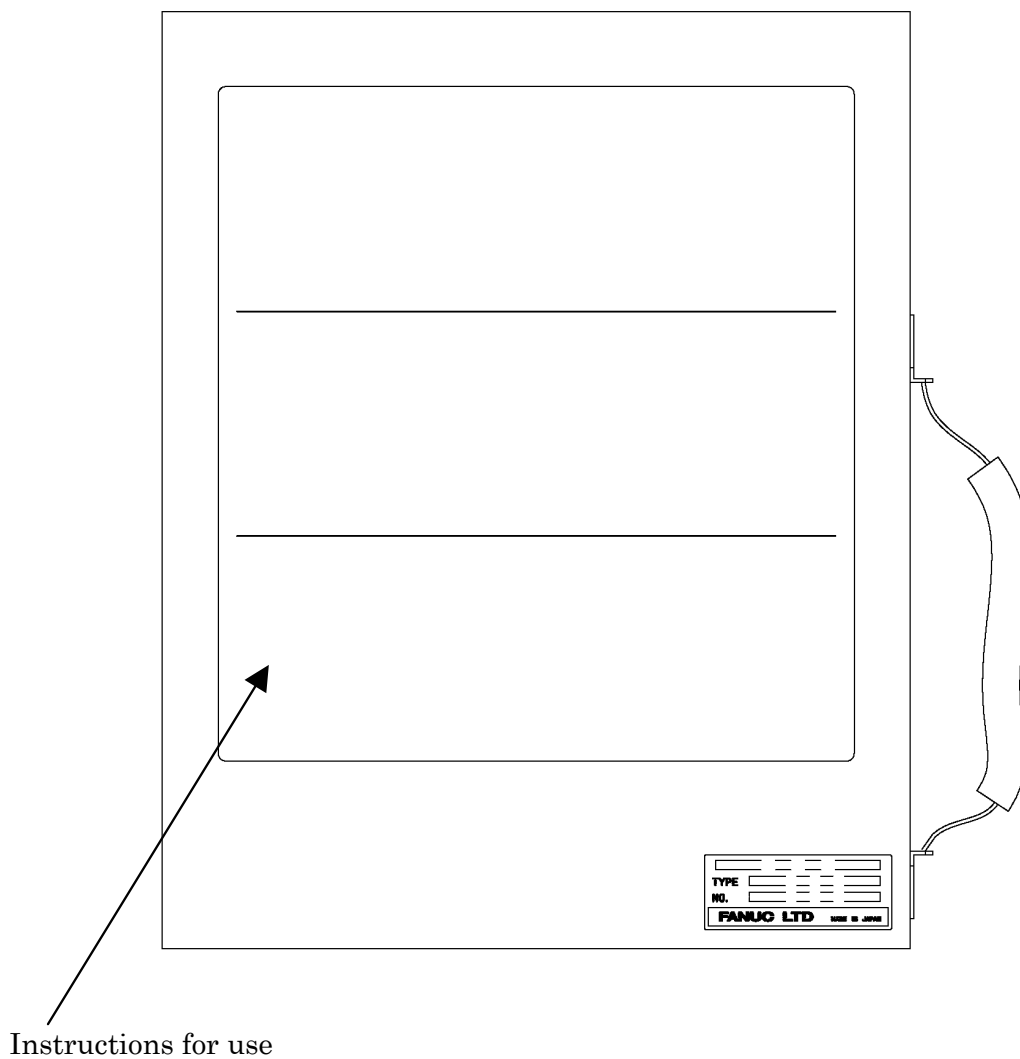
(b) Dimension of Brake Release Unit(Rear view)
